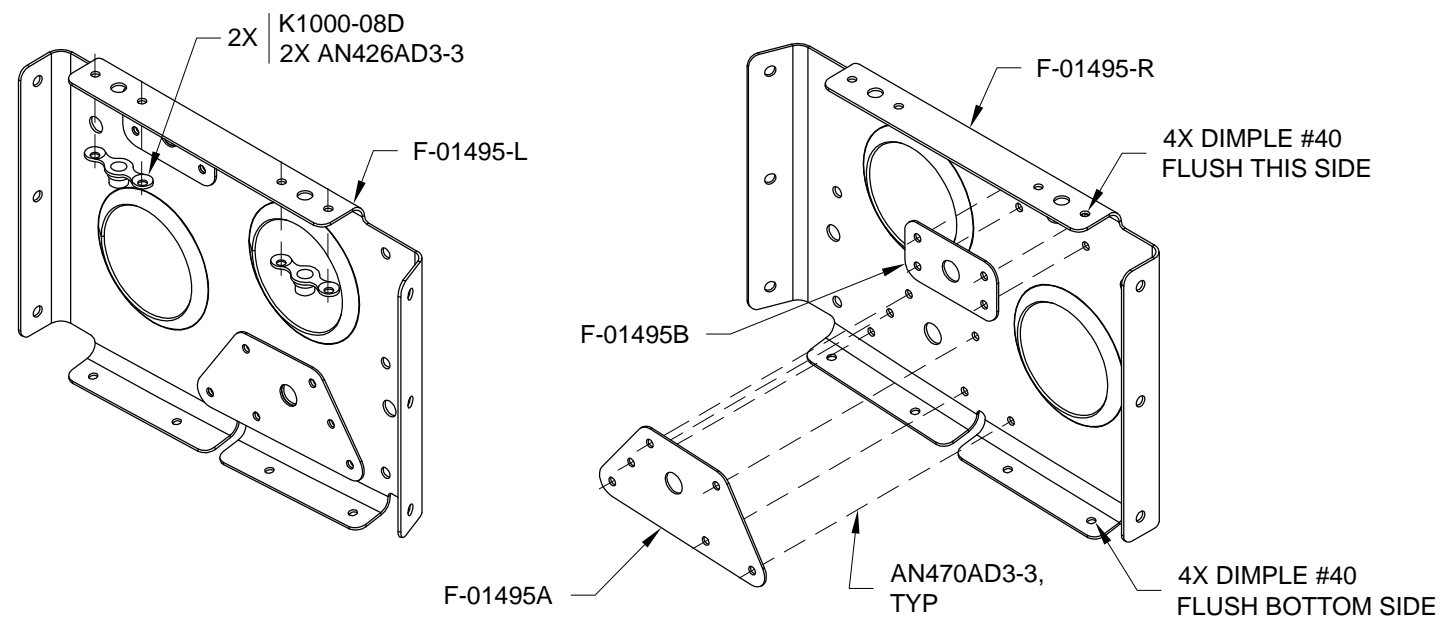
RIVET RIB DOUBLERS & NUTPLATES
